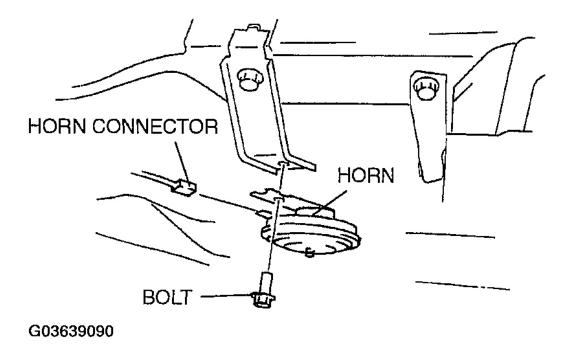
Removing Horn Courtesy of MAZDA MOTORS CORP.
